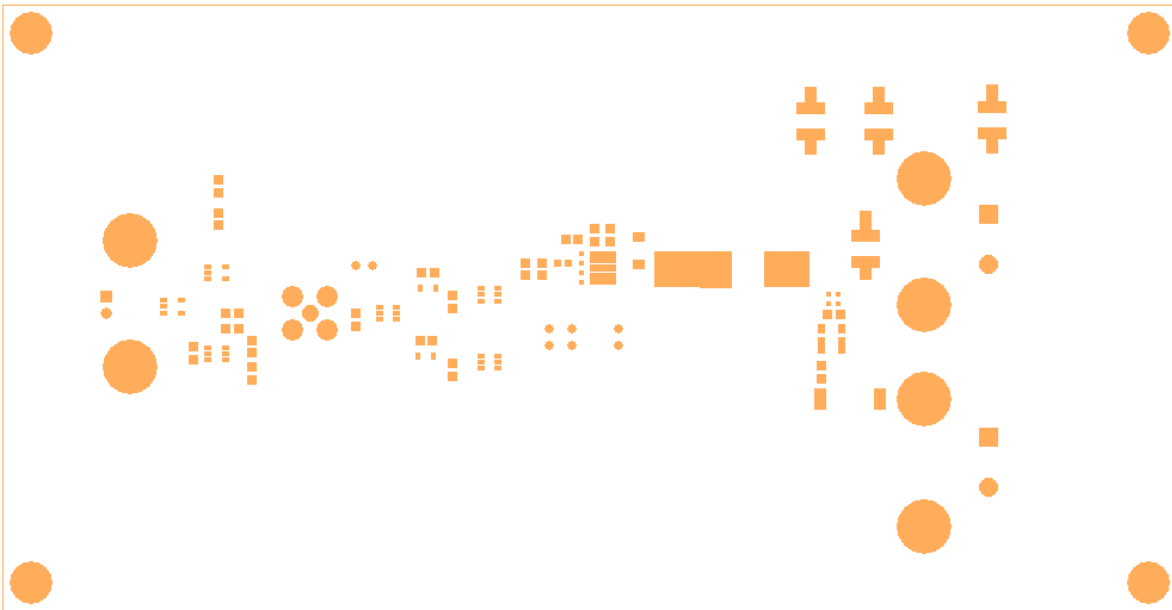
EPC7C020/EPC7011L7 Boost Evaluation Board Top Solder Mask.
